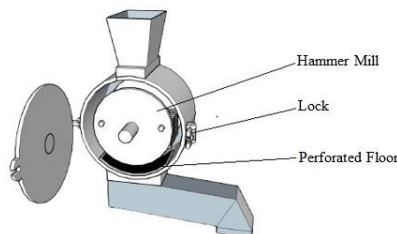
c The Hammer Mill Inside the small-scale integrated Saba banana flour mill.
